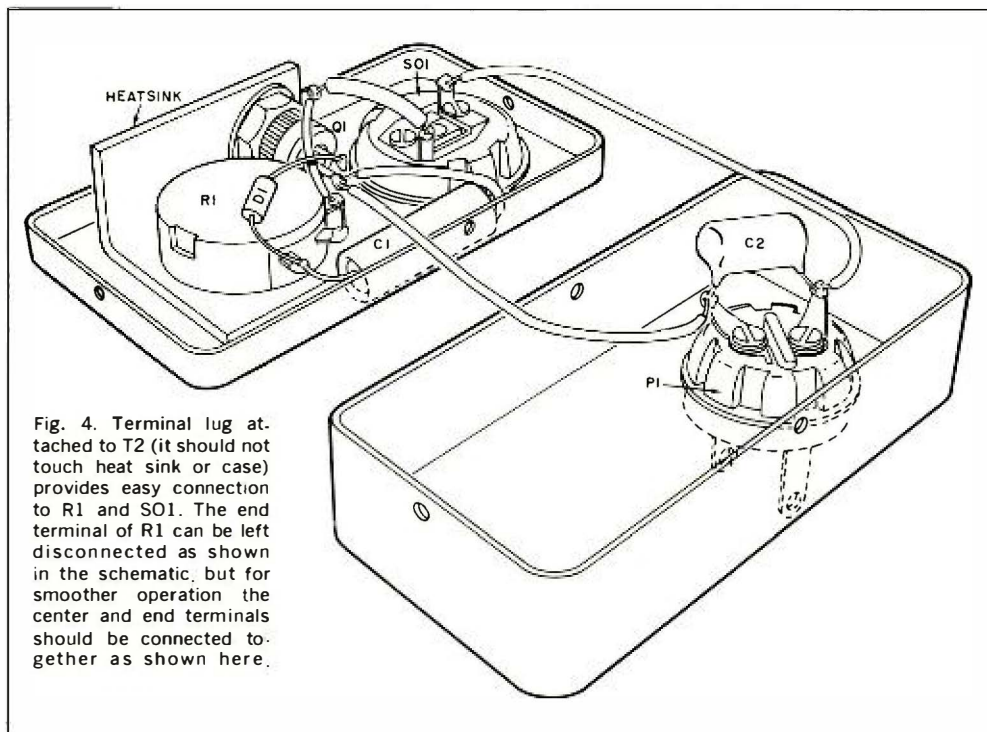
Terminal lug attached to T2 (it should not touch heat sink or case) provides easy connection to R1 and S01. The end terminal of R1 can be left disconnected as shown in the schematic, but for smoother operation the center and end terminals should be connected together as shown here.
